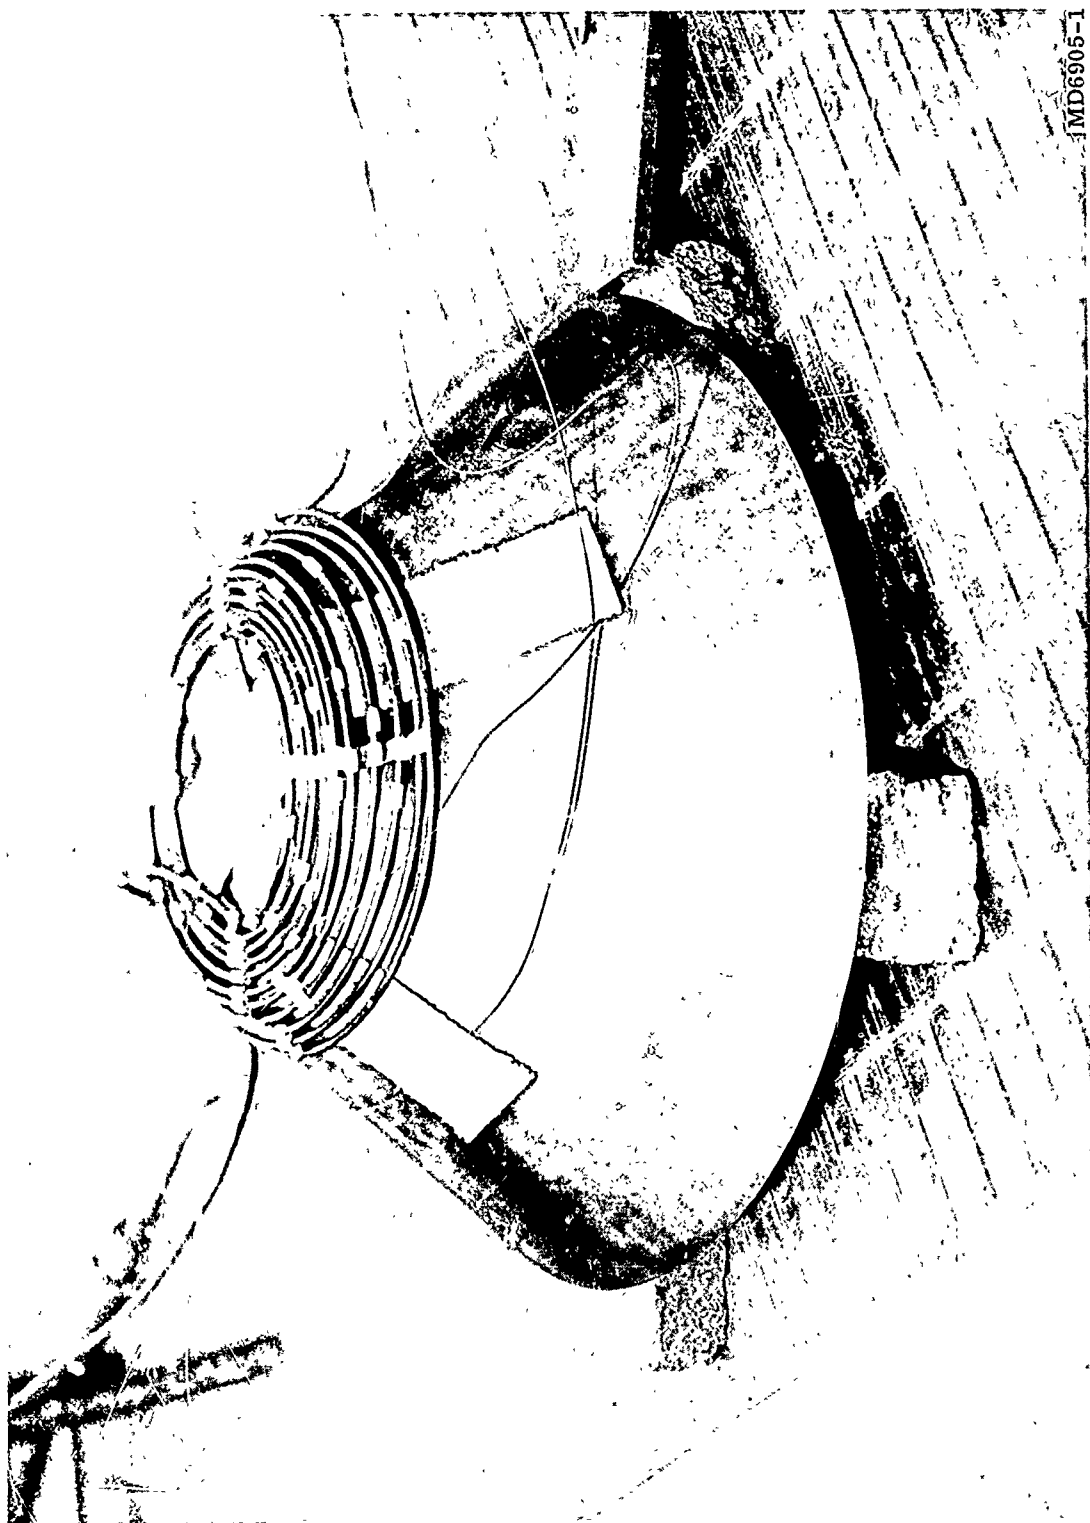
Stress Relieving Circumferential Weld with Induction Coil
